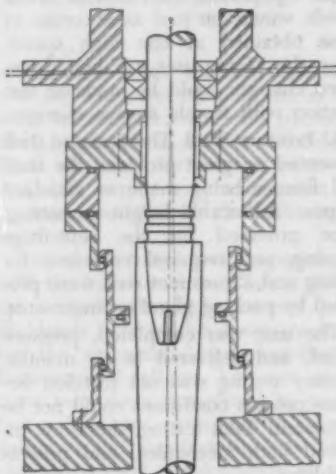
Shaft swing to left in PC-30 centrifuge.
